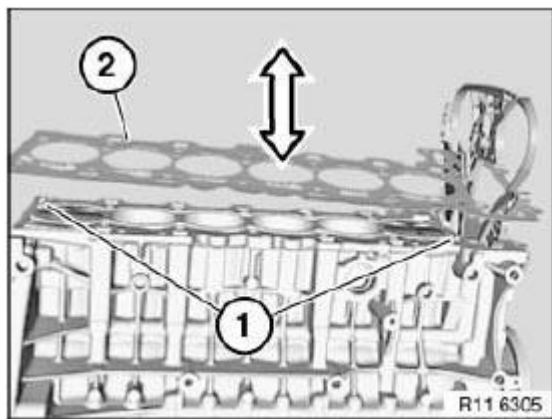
Cylinder Head Gasket And Adapter Sleeves
